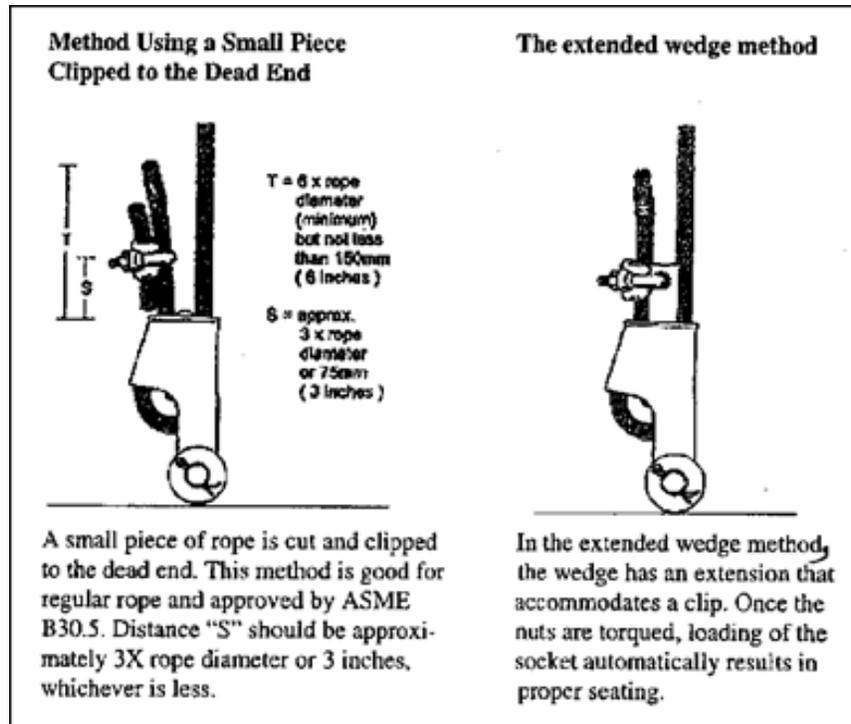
Two recommended methods of attaching the socket to the wedge before use.
